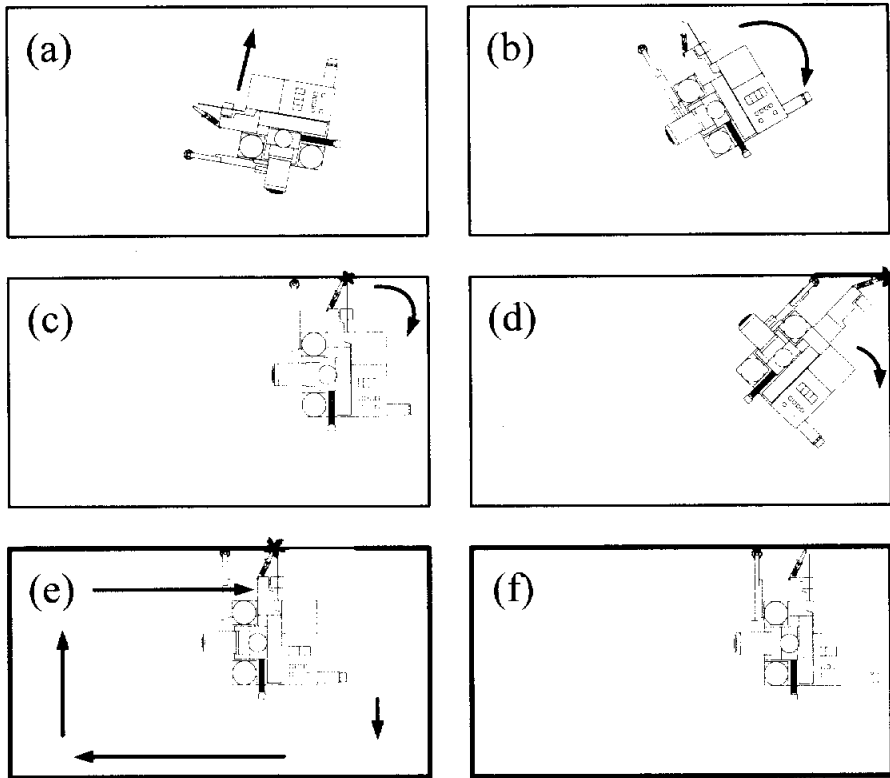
Operating patterns of a mobile robot at a box type of welding
